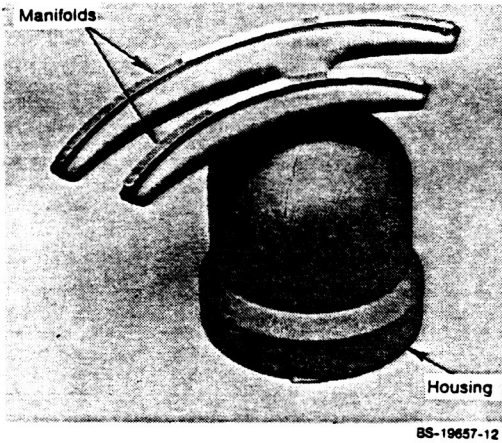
Mod II Heater Head Casting (XF-818 Material)
